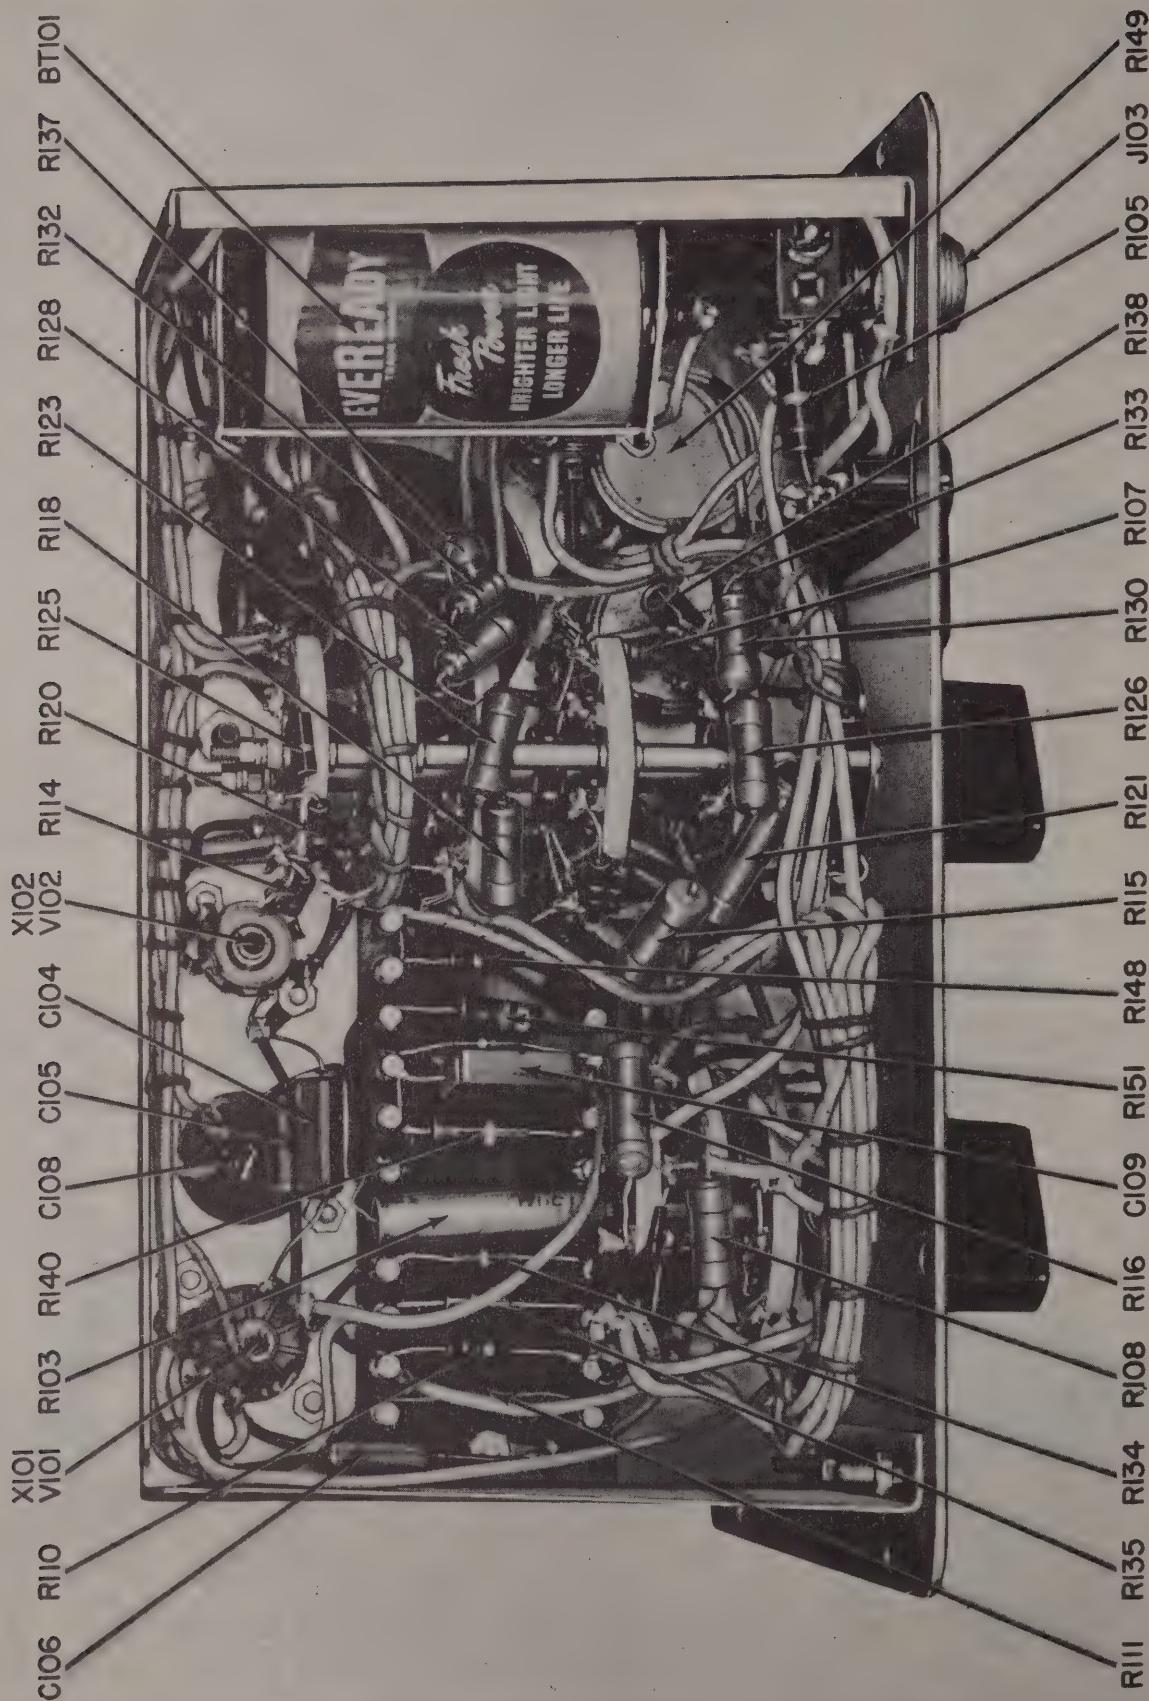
Multimeter ME-25A/U, Case Removed, Bottom View
